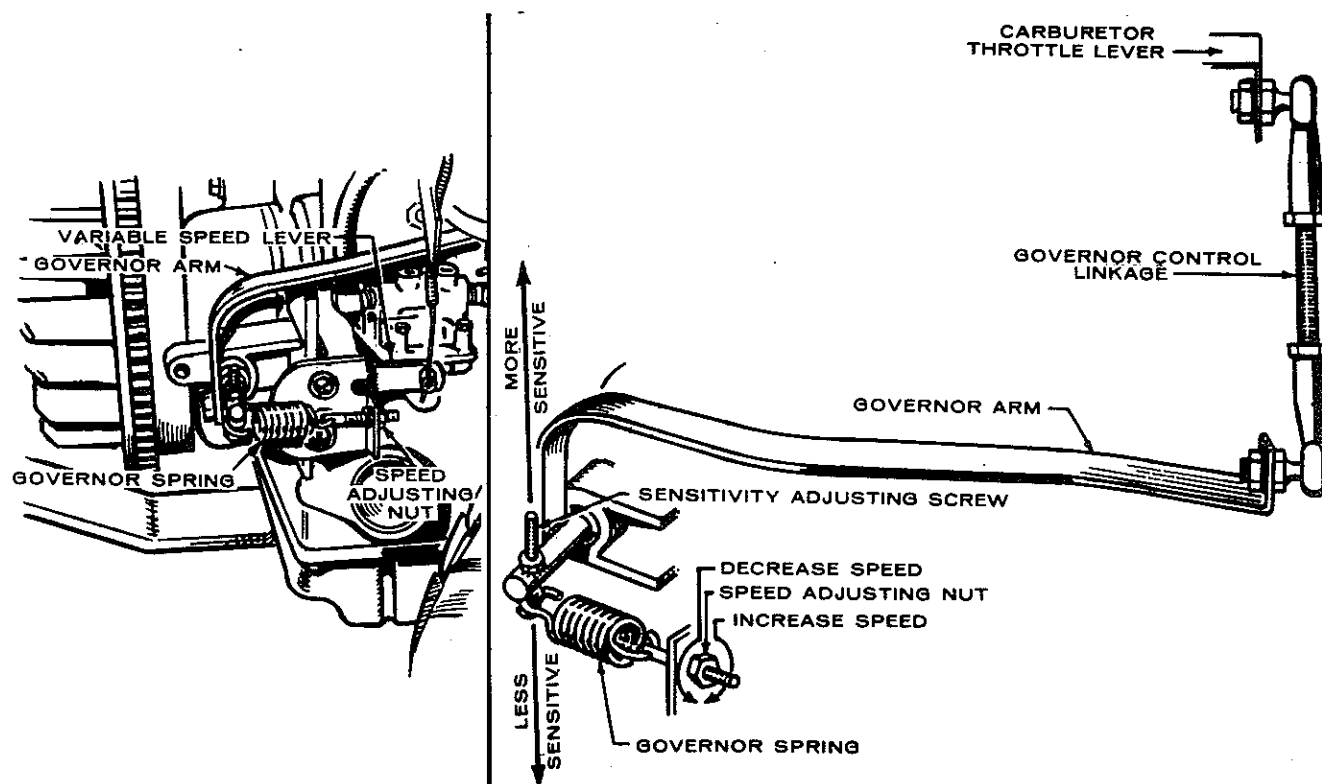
NB WELDER GOVERNOR ADJUSTMENT
